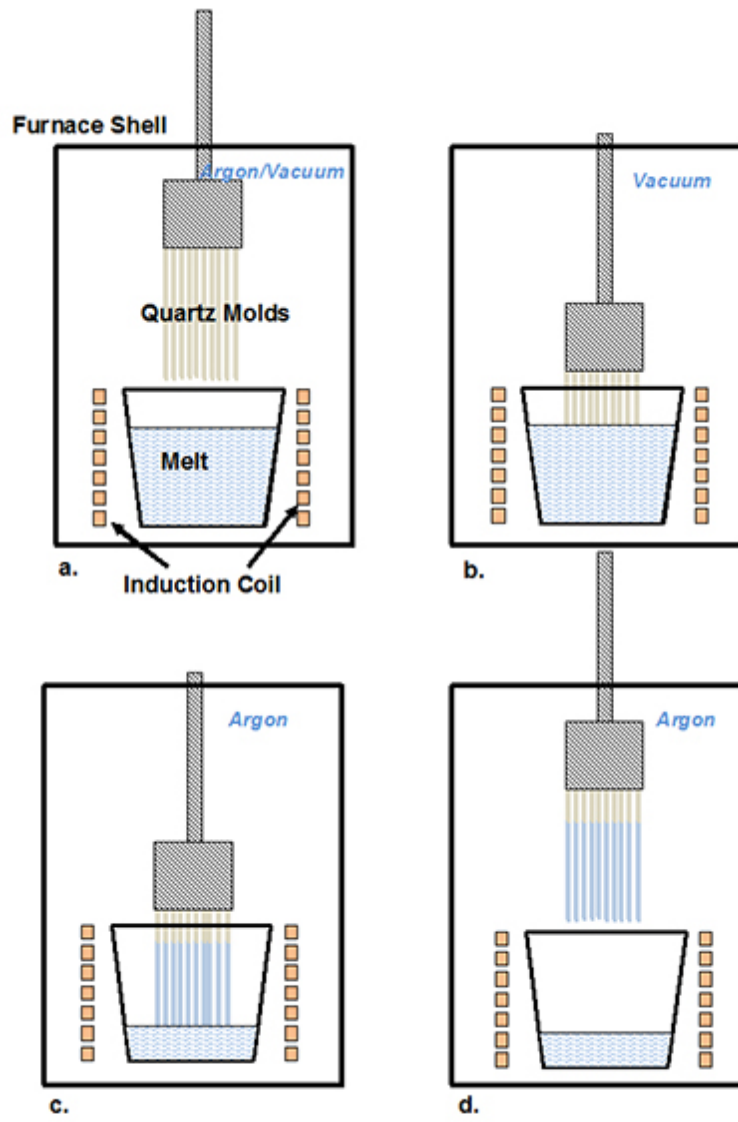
Sketch of the injection casting process used to make EBR-II U-10Zr fuel.
